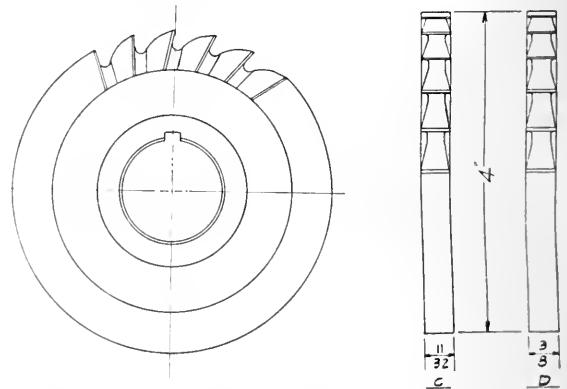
STANDARD AND SPECIAL-SIZE MILLING CUTTERS
